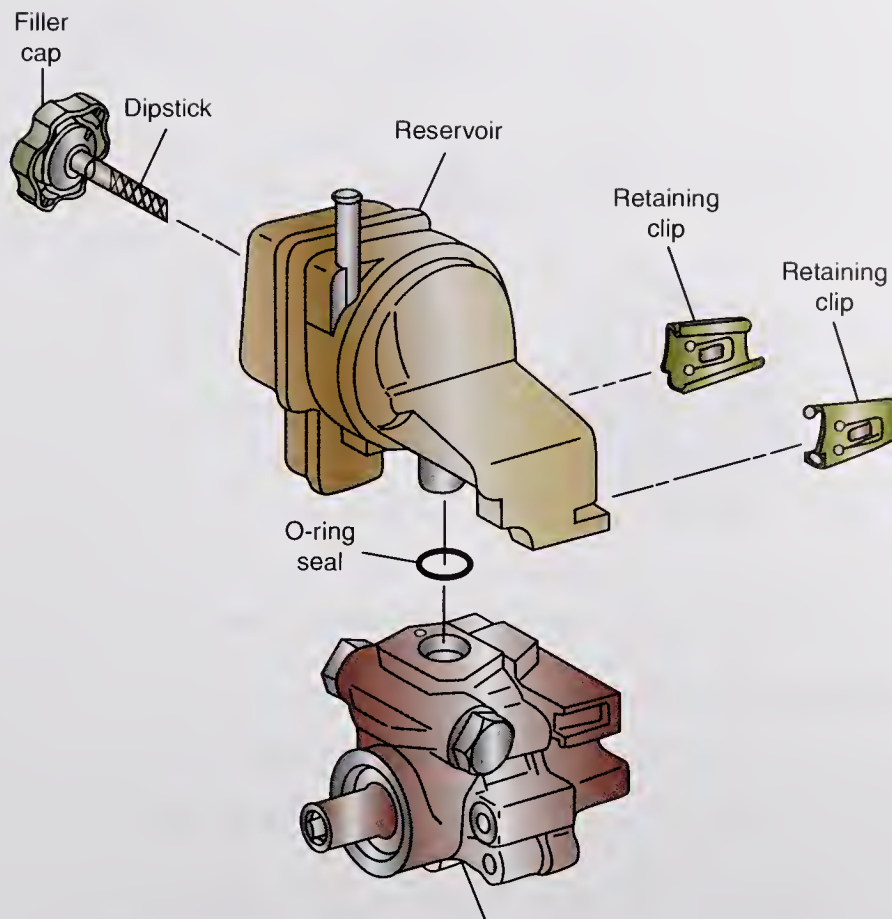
Integral power steering pump reservoir seal and O-ring.
